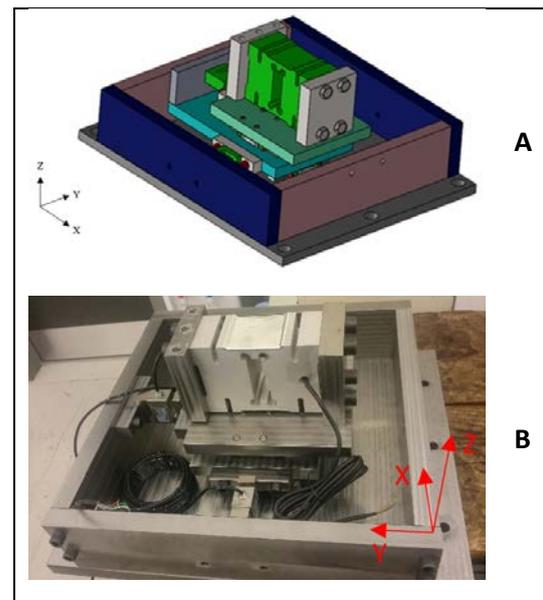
Force measurement system. A: Design installation, B: Manufactured
